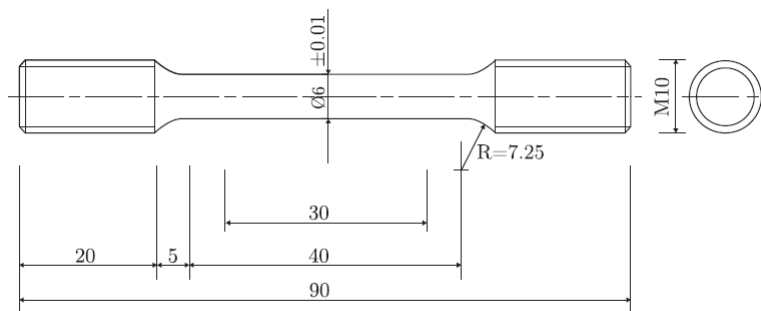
Tensile specimen geometry (dimensions in mm).
